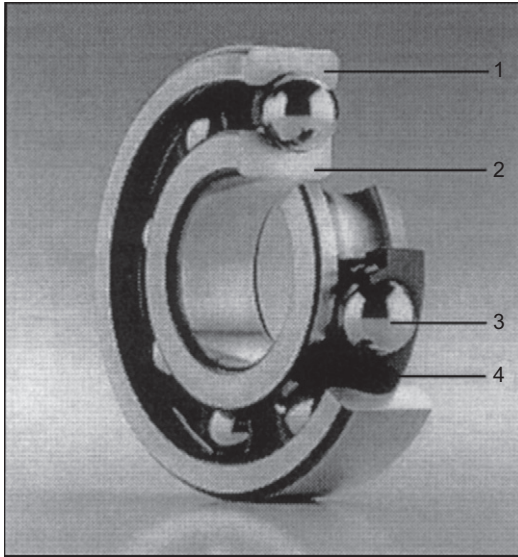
Rolling bearing terminology (courtesy FAG bearings).
